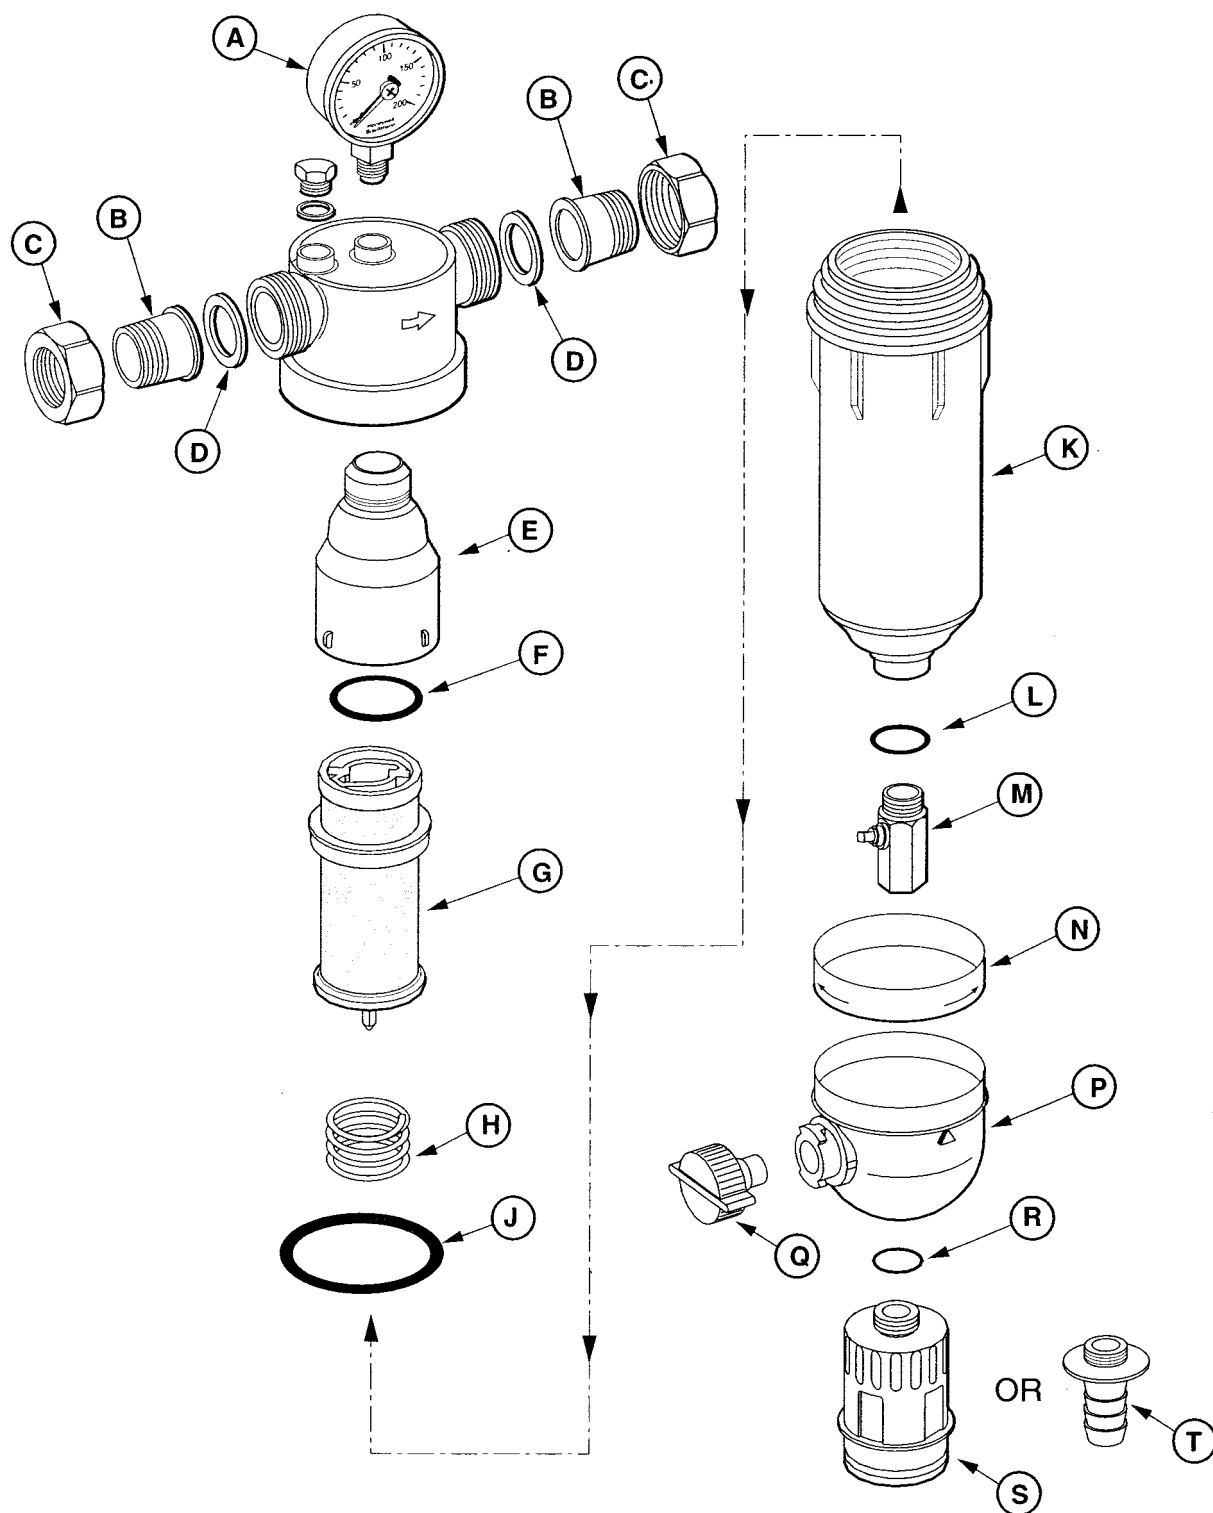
F76S exploded view. Parts are keyed to F76S Replacement Parts List.
